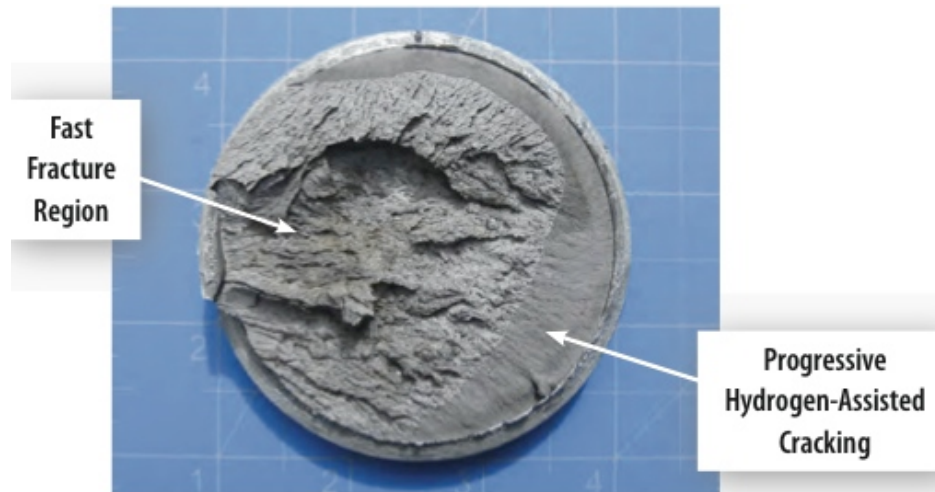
Fracture surface of Shear Key S1 rod after cleaning [45].
